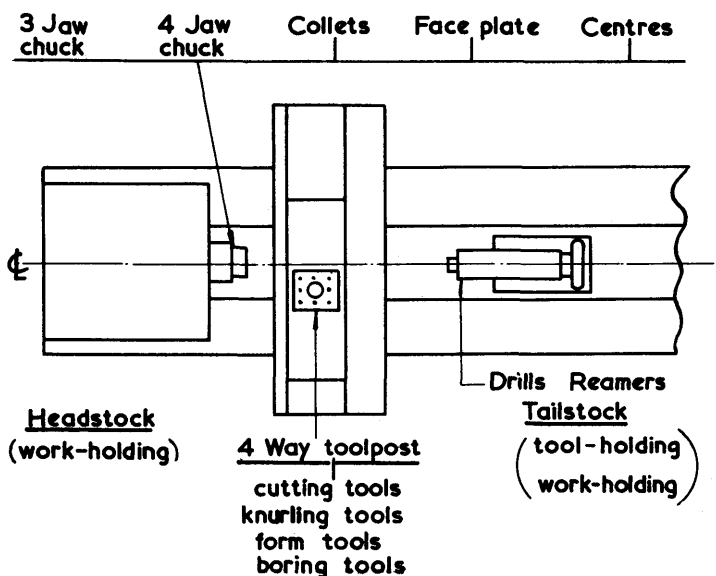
Work Holding and Tool Holding on a Centre Lathe.
